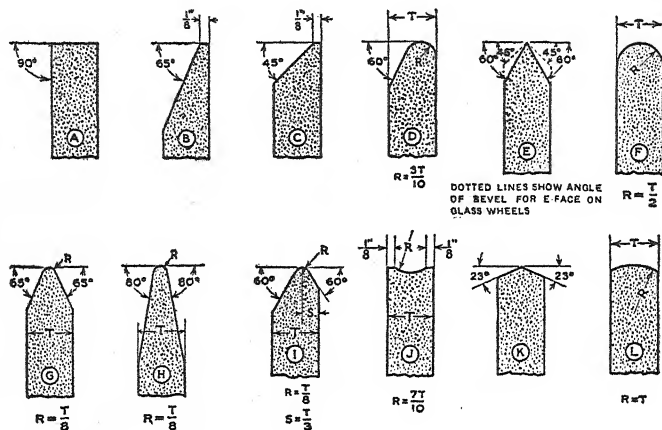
Standard Shapes of Grinding-Wheel Faces.
